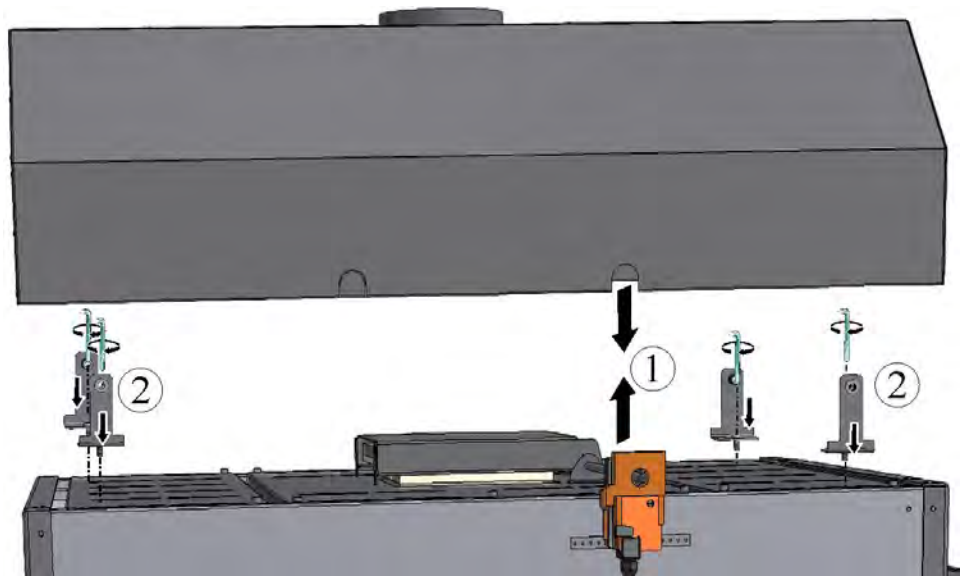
Example: Positioning the exhaust hood/s (similar to picture)
